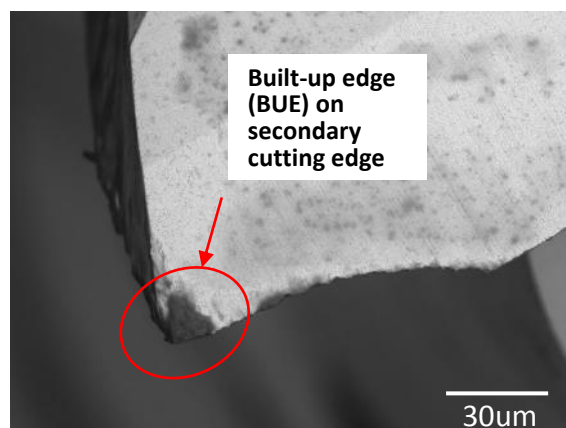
Built-up edge formed on cutting edge corner at Tool #3 (cutting speed of 125.6m/min, feed per tooth of 3 μm and depth of cut of 100 μm)
